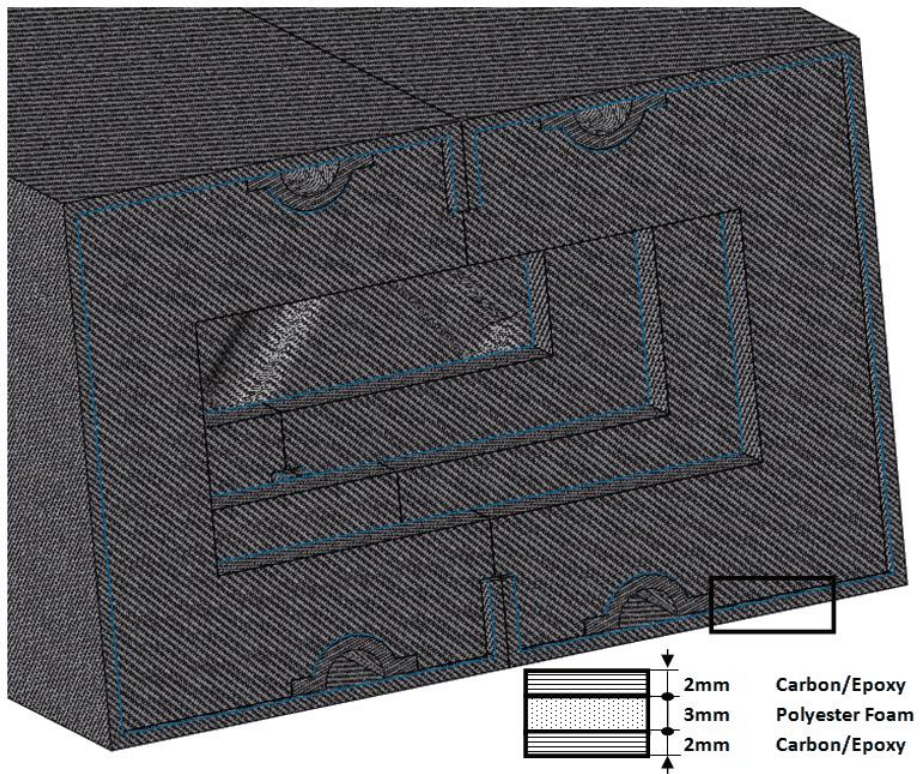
Extremity of the beam with a special detail of the wall laminate structure
